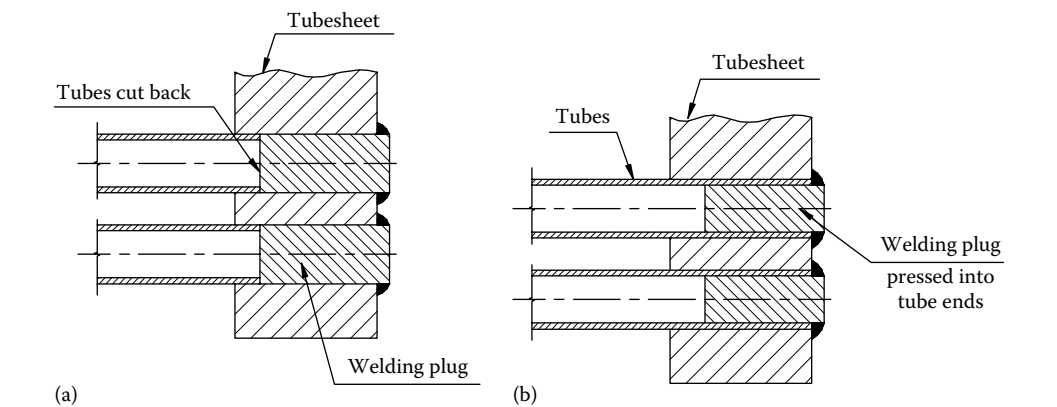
(a–b) Tube plugs welded at the tube ends.
